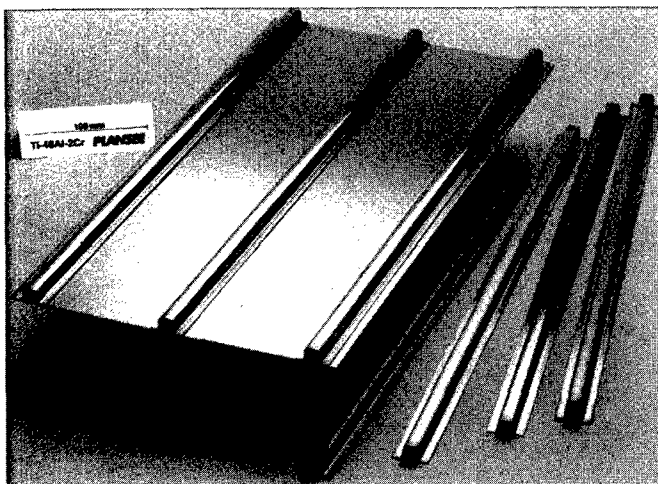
500 mm long stringer components manufactured out of IM Ti-48Al-2Cr sheet material with near gamma microstructure (sheet thickness: 1 mm).
